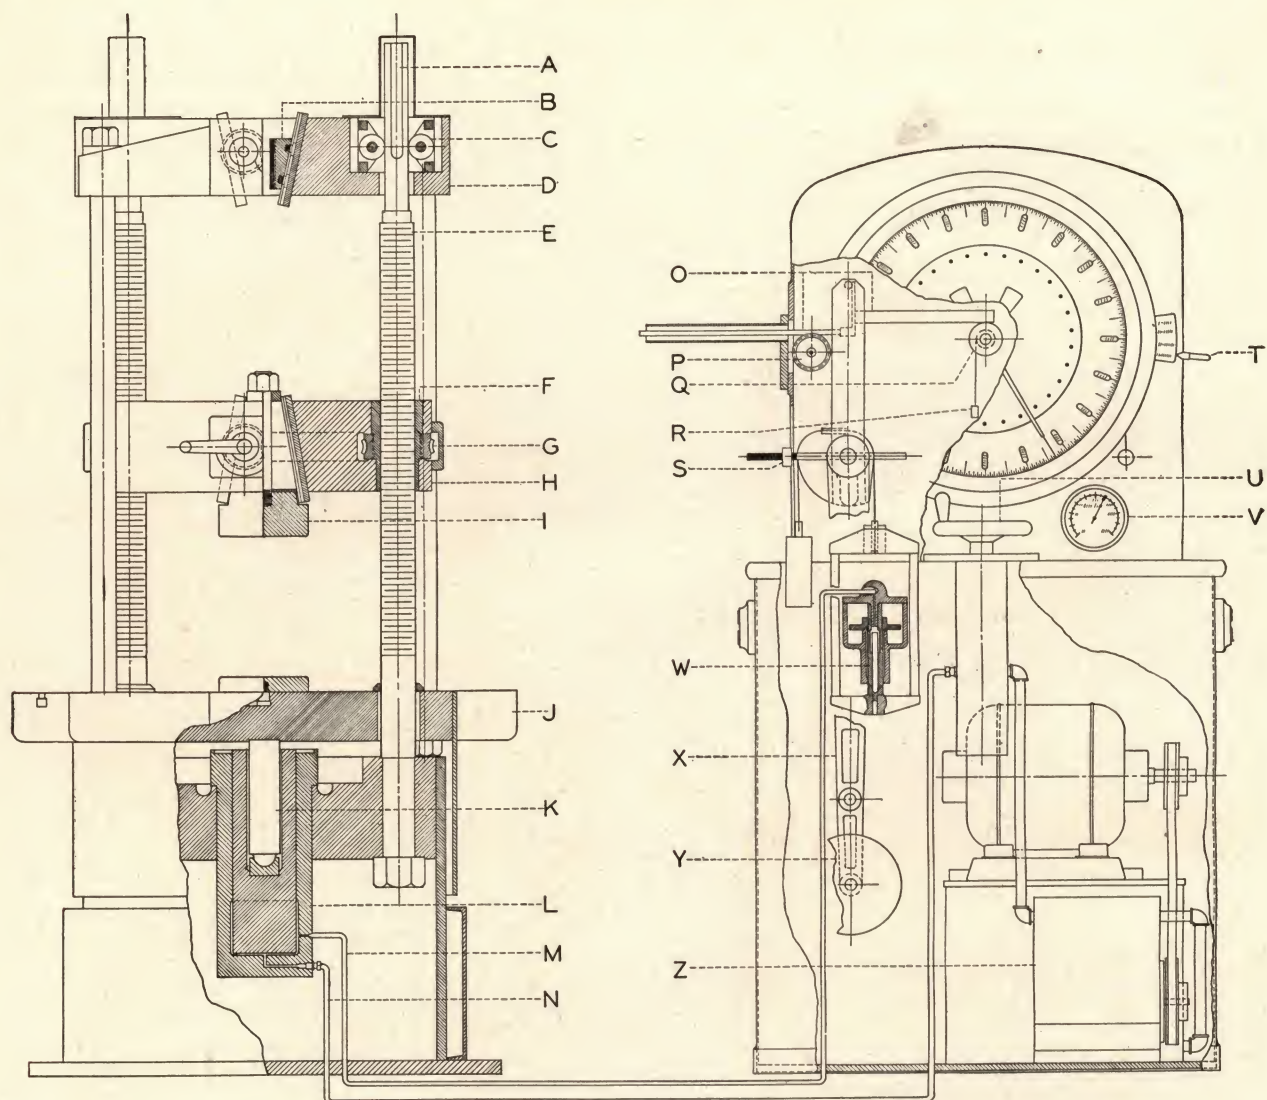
Diagram of an hydraulic testing machine with a pendulum-type weighing system. (Courtesy of Tinius Olsen Testing Machine Company.)
